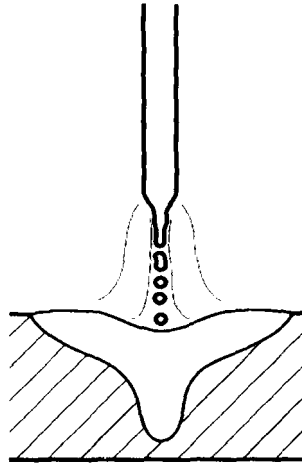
Example of streaming spray transfer and a ‘finger’ weld penetration geometry. (taken from [13]).
